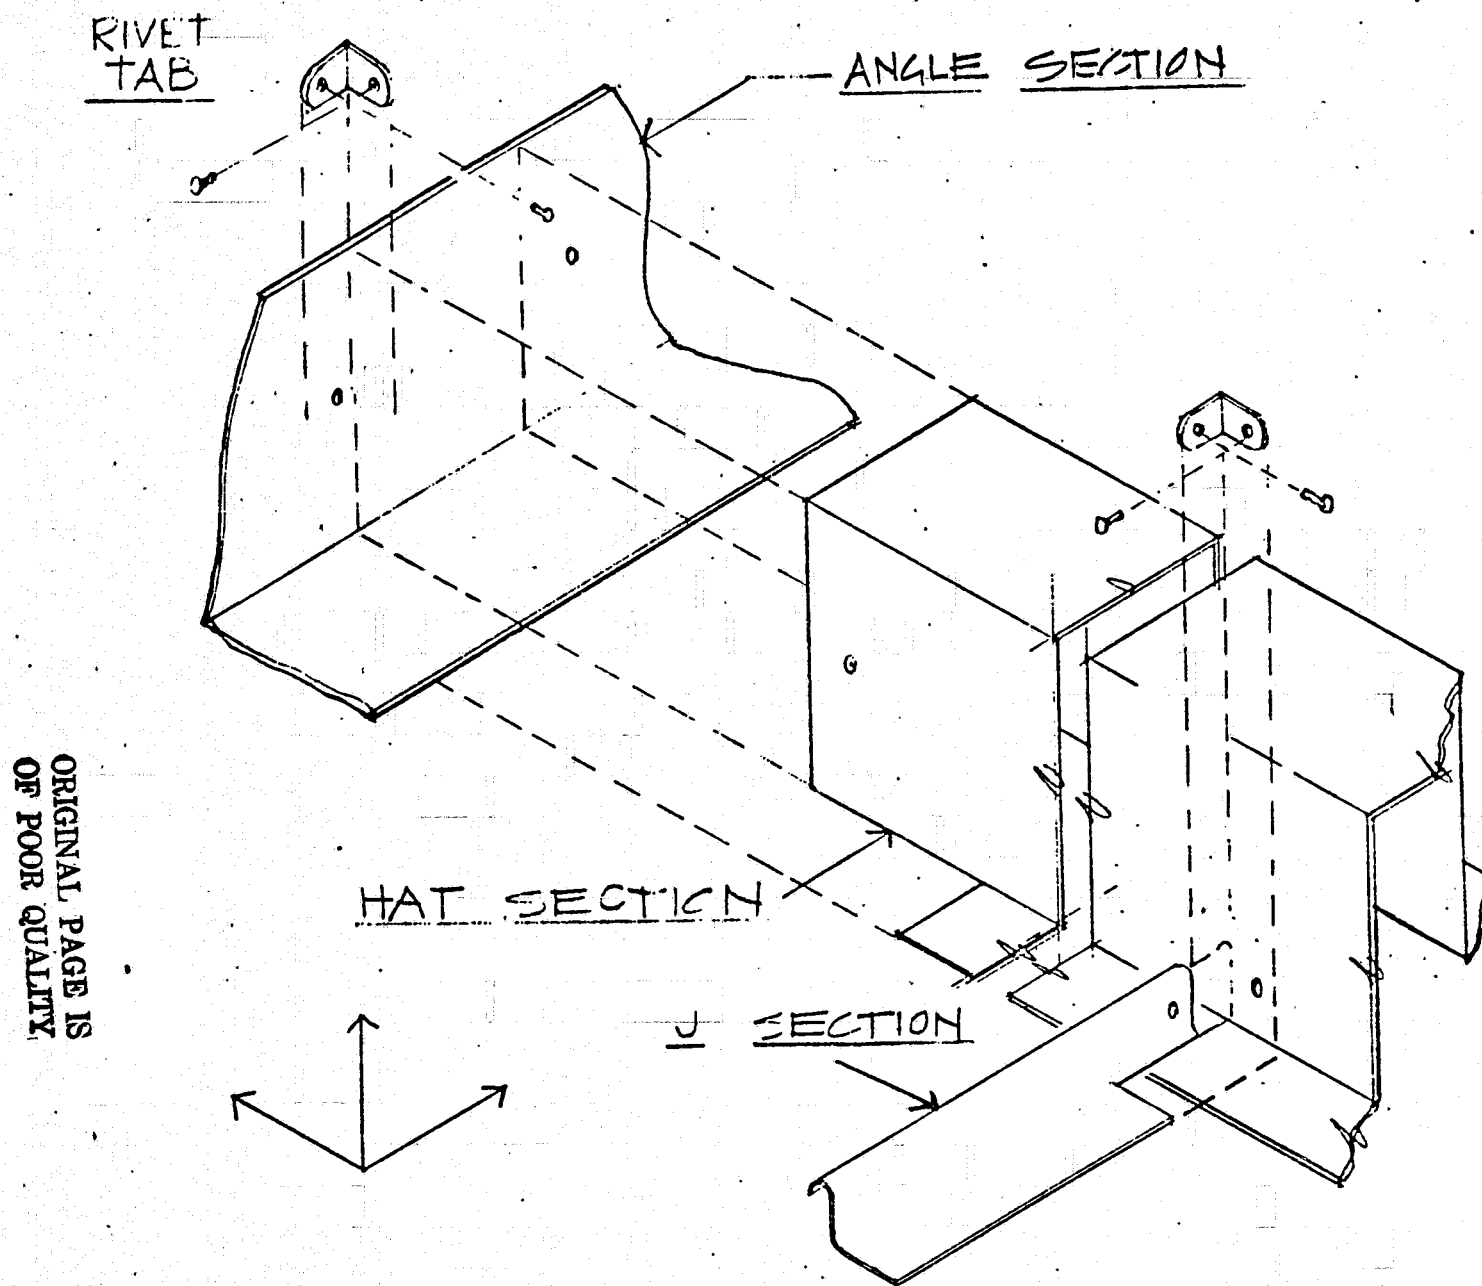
DETAIL A AND DETAIL B ASSEMBLY OF STRUCTURAL SECTIONS.
